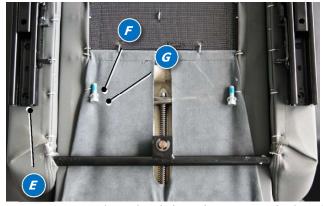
Mounting the guide rails (option) - screw in rear fastening screws (do not tighten)
